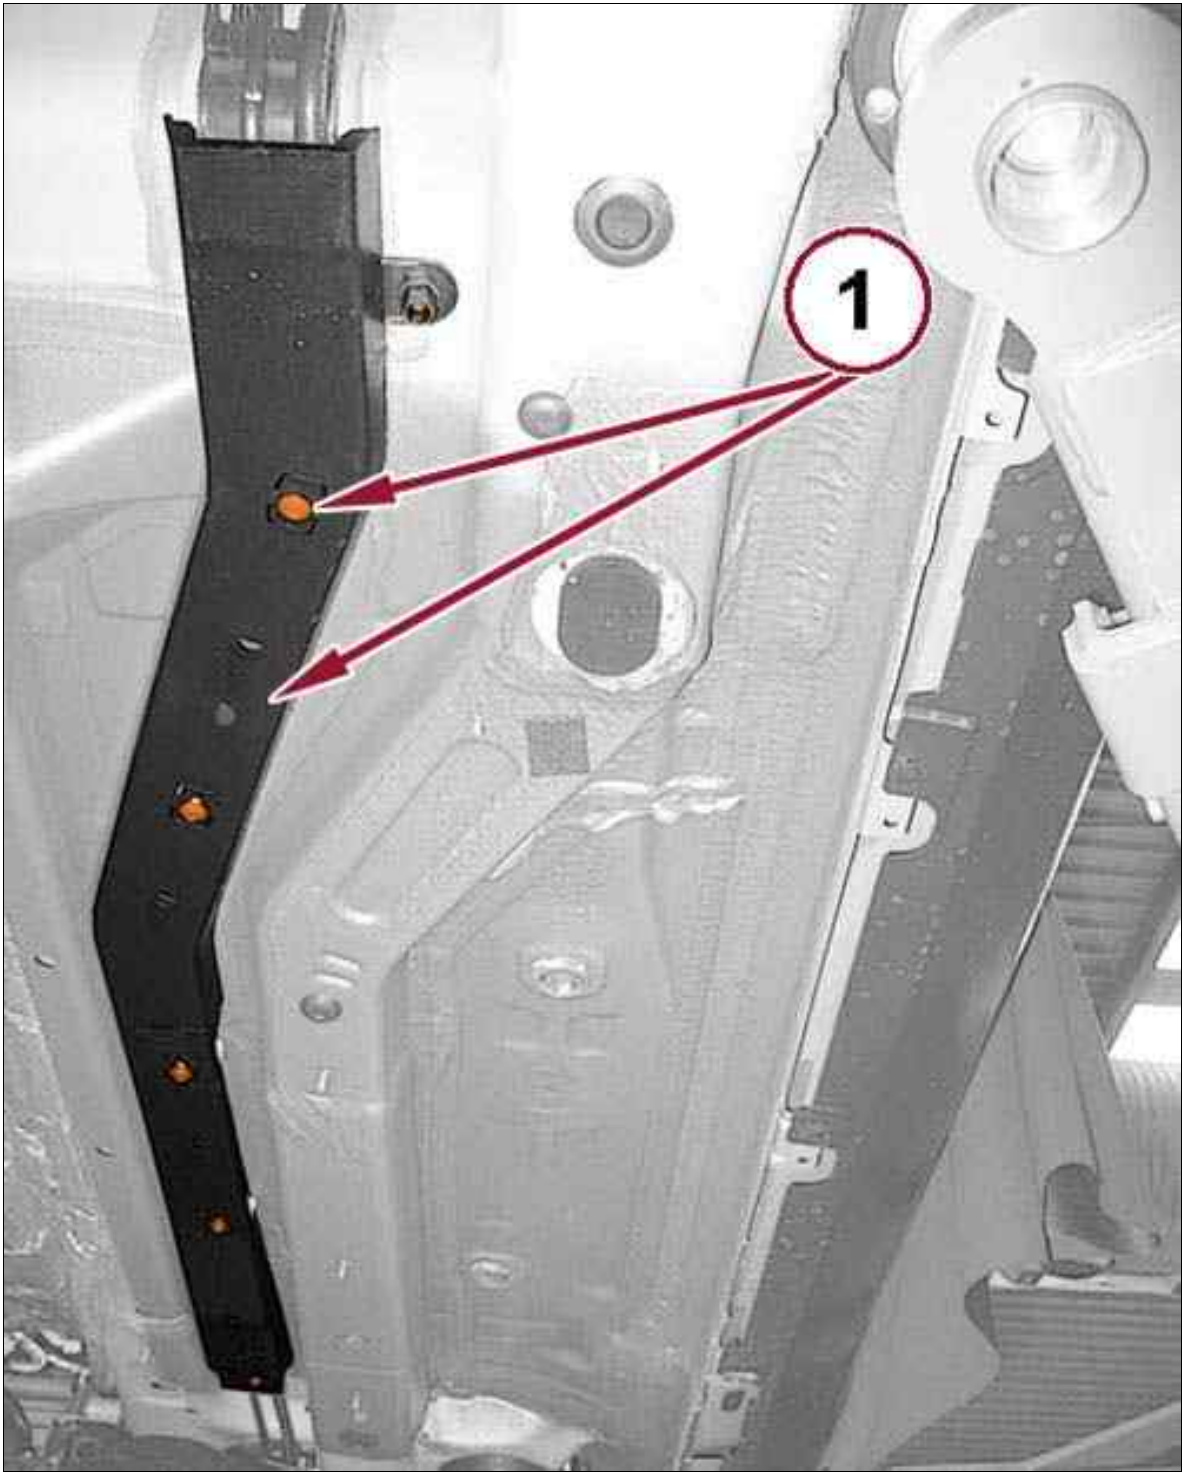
Fuel Delivery Line Retainer Clip & Coupling
